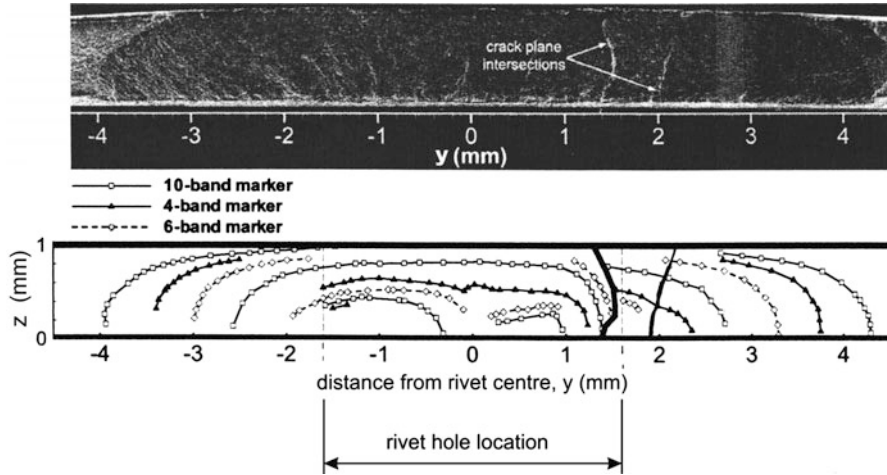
Example of crack front reconstruction for a crack initiated and propagating outside a rivet hole. Marker load spectrum used to determine crack front shape (Rans 2007)
